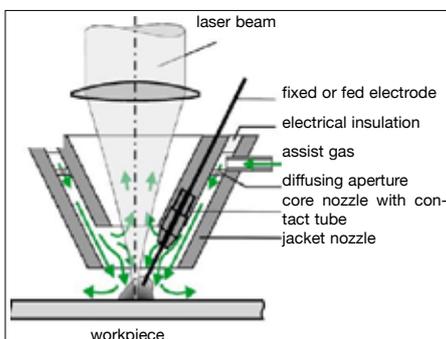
Sketch and practical set up of the integrated hybrid welding nozzle
